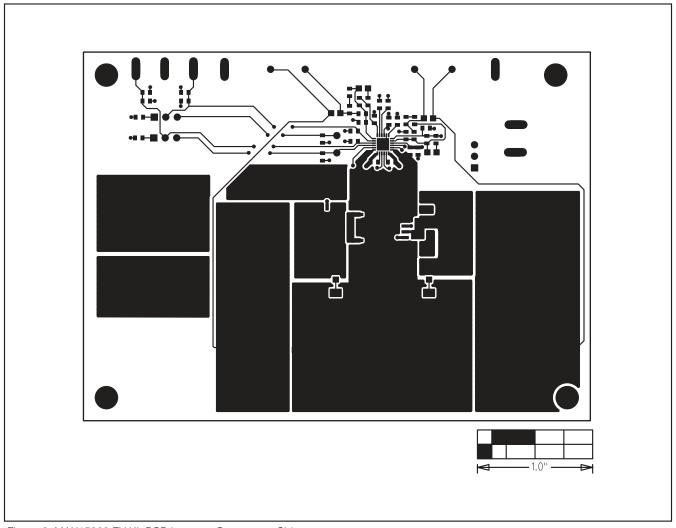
MAX15023 EV Kit PCB Layout—Component Side
